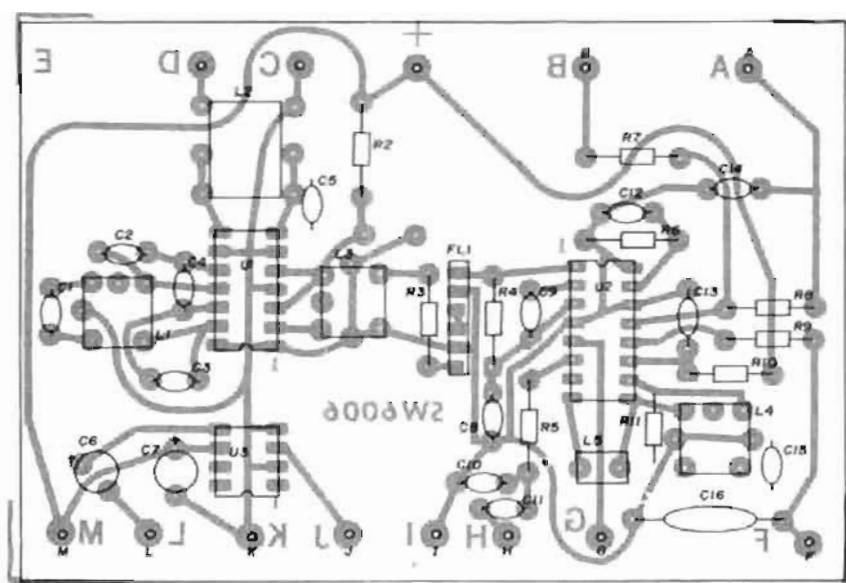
A. Component layout on the WA2PZO printed circuit board (foil side down).
